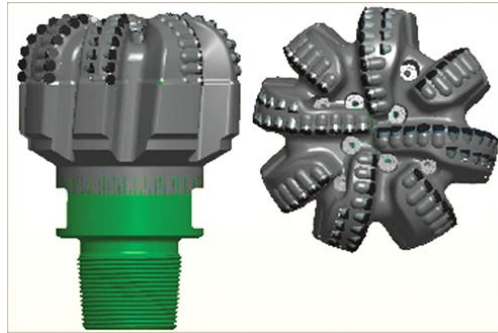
PDC drill bits with 8 blades. (drillingcontractor.com)
